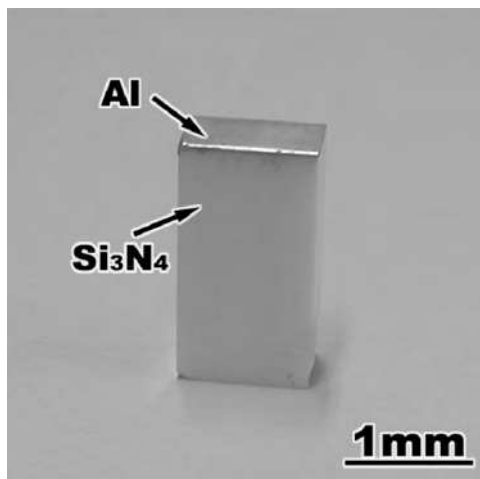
An outer view of the explosively welded Al/Si₃N₄ clad. In this figure, upper Al as flyer plate is bonded onto Si₃N₄ base material during explosive welding. And no macroscopic cracks are observed.
